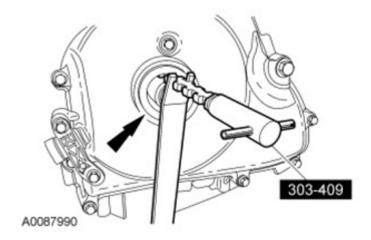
Removing Crankshaft Front Oil Seal Using The Oil Seal Remover Courtesy of FORD MOTOR CO.
